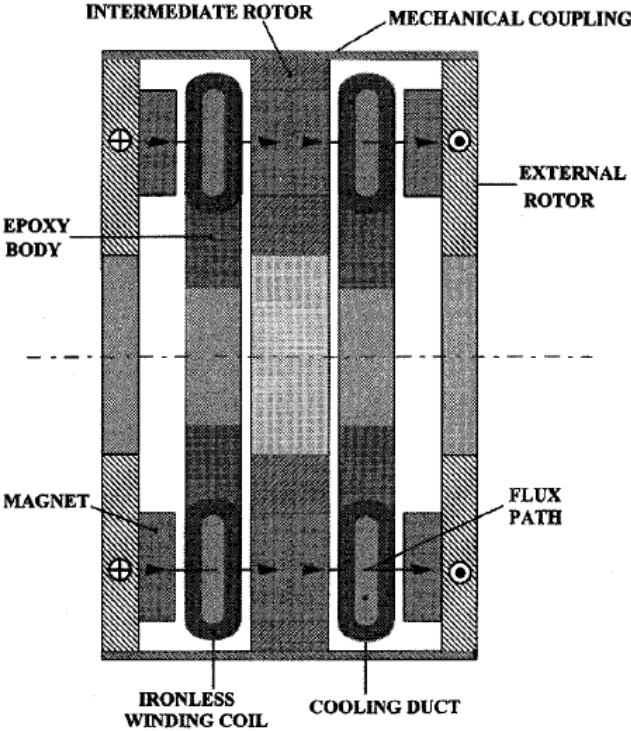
Multi-stage AFPM machine with two stator and three rotor disks and having air cored stator [83].
